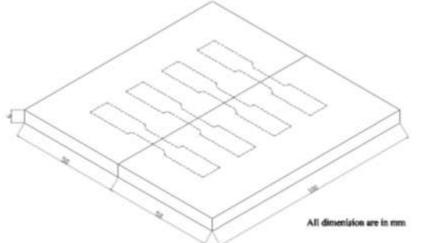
Extraction of tensile specimen from friction stir welded joints
